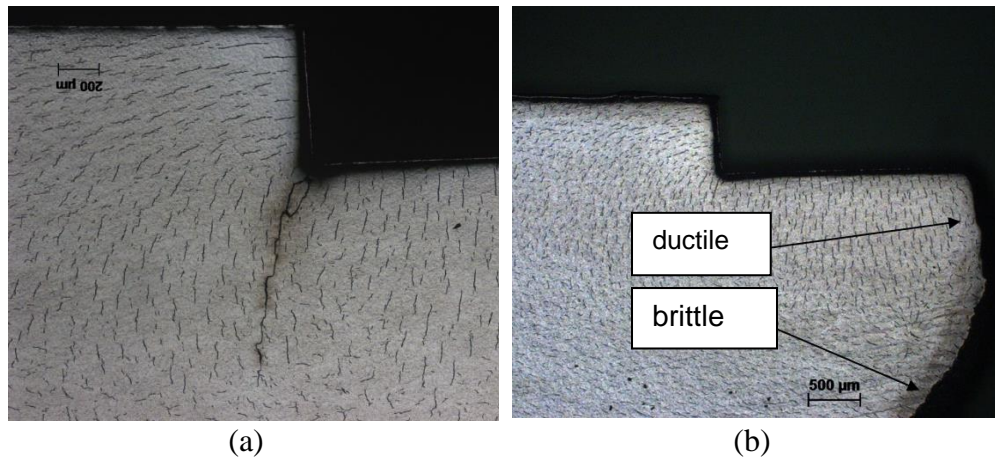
Crack initiation (a) and rupture (b) in mechanical fatigue tests on samples with bearing pad-like defects.
